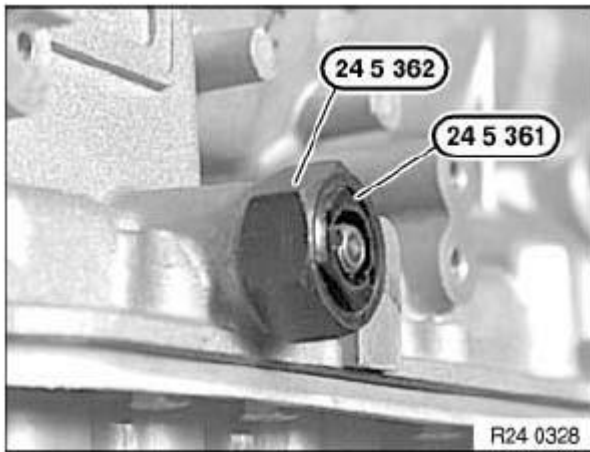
Identifying Special Tools (24 5 362 And 24 4 361)
